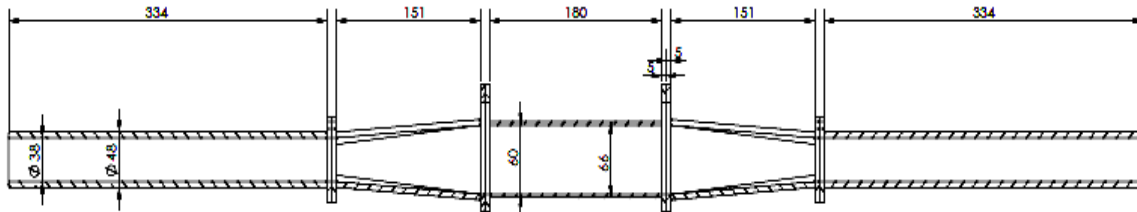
Schematic layout of exhaust heat exchanger (test section 60 × 60 × 180 mm) (F-type).
